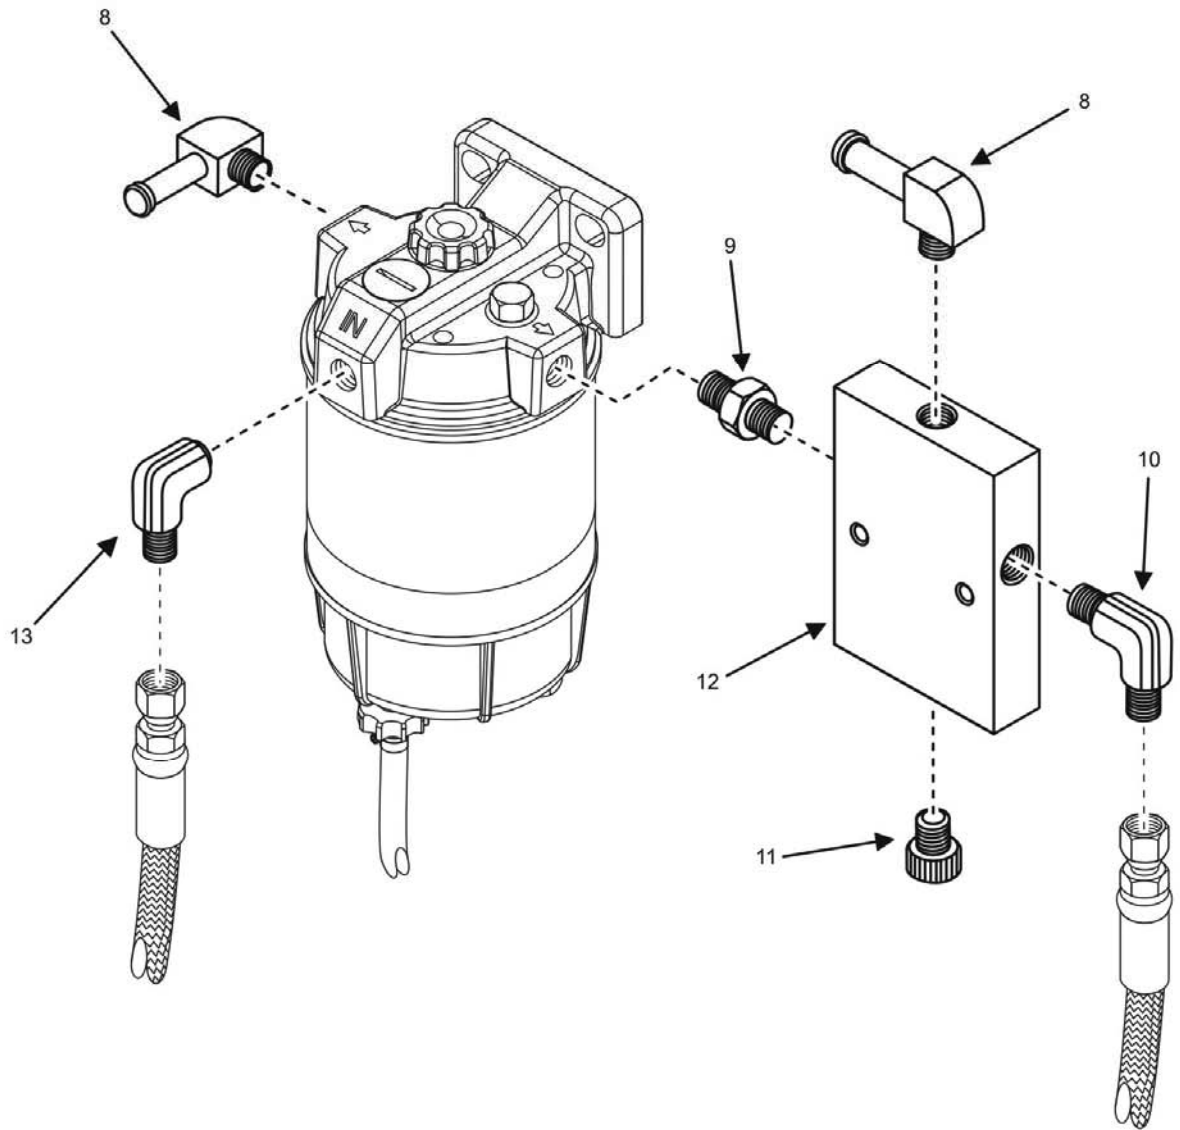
Fuel Filter/Water Separator Assembly (Sheet 2 of 3).
